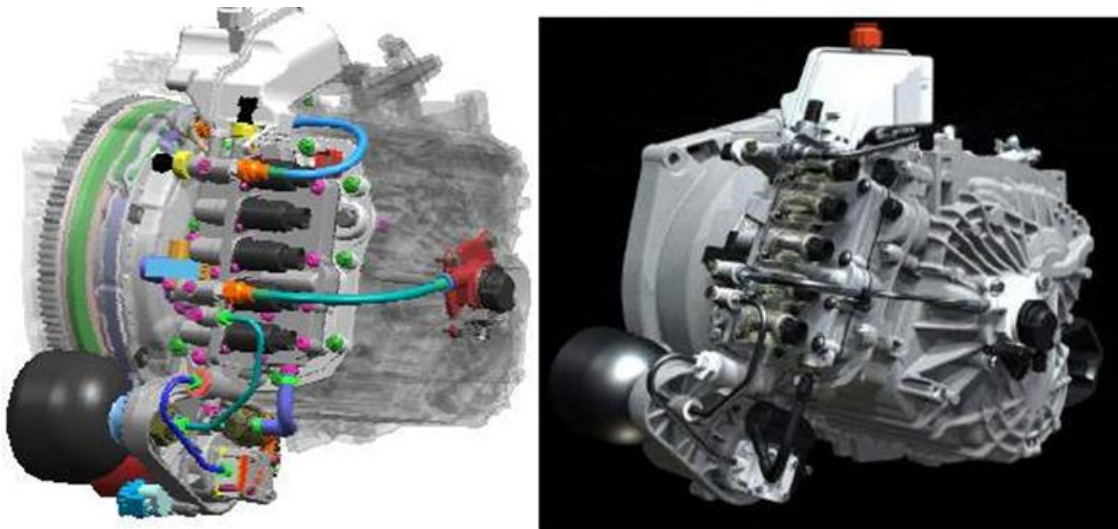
The complete Clutch Actuation Module (CAM) (upper and lower view)
